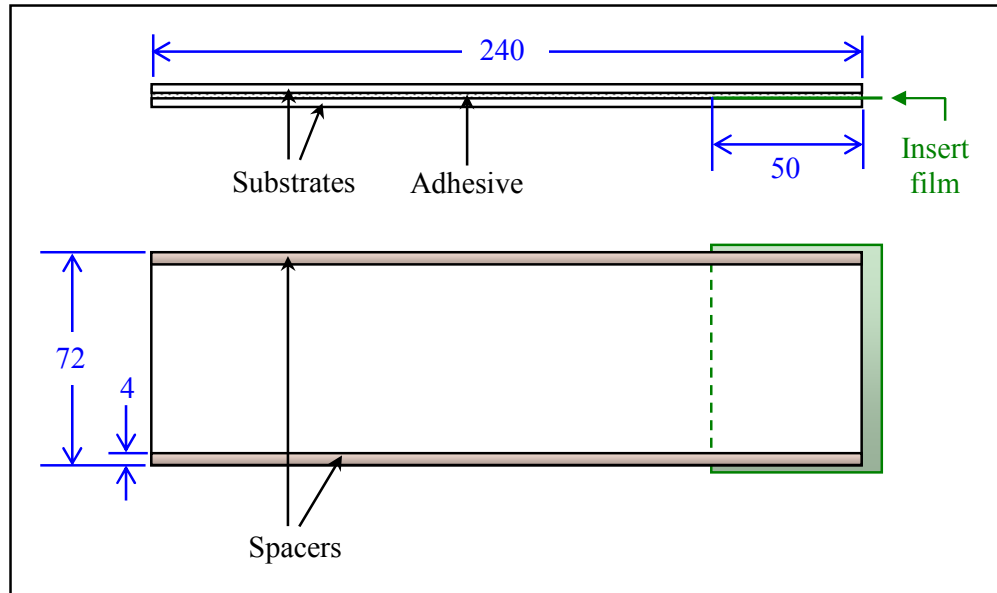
Panel layout for bonded GFRP testing coupons (dimensions in mm)
